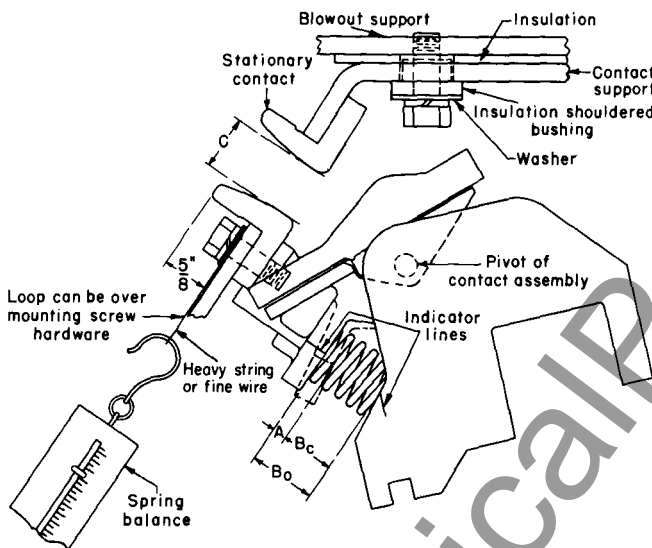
View of contacts in open position with letters designating important contact dimensions.
